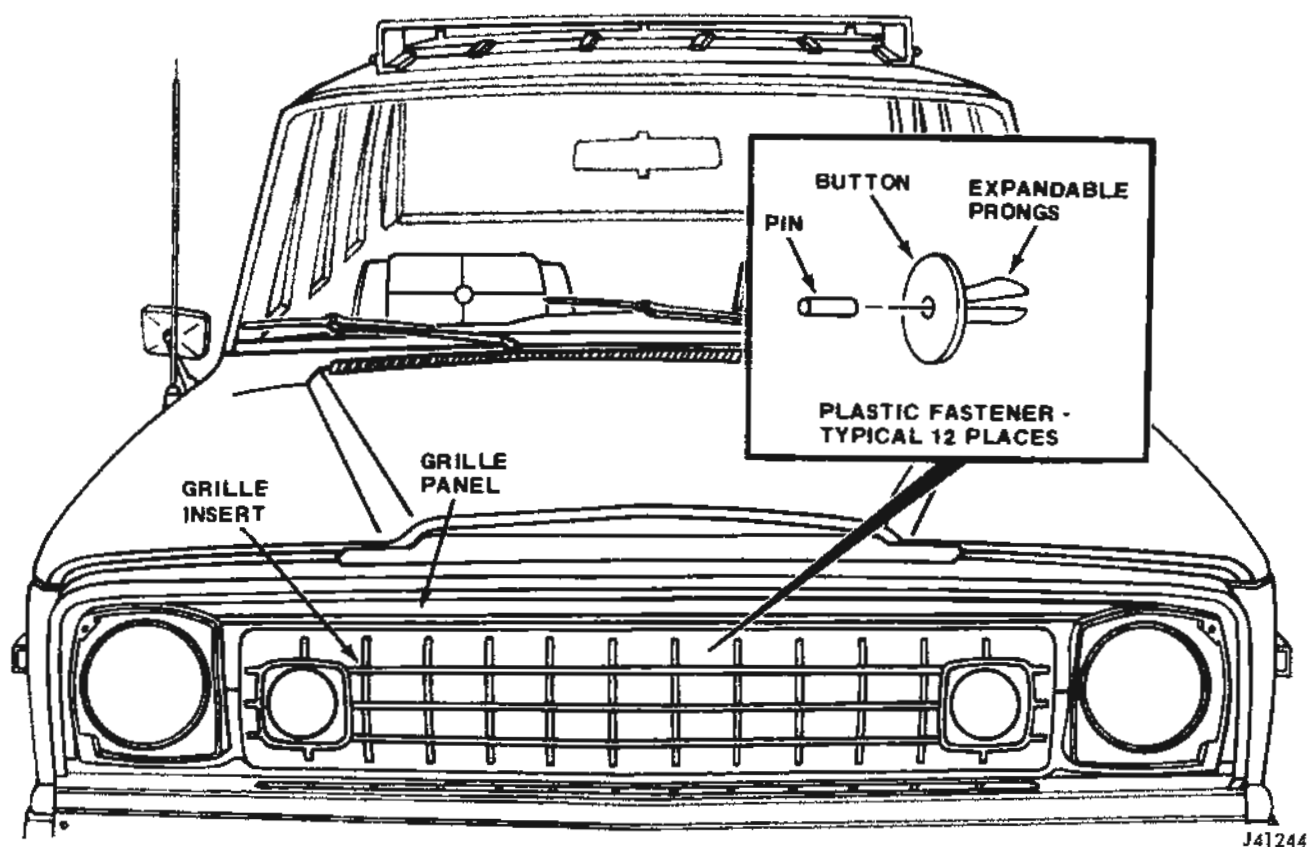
Grille Insert and Fasteners - Wagoneer
